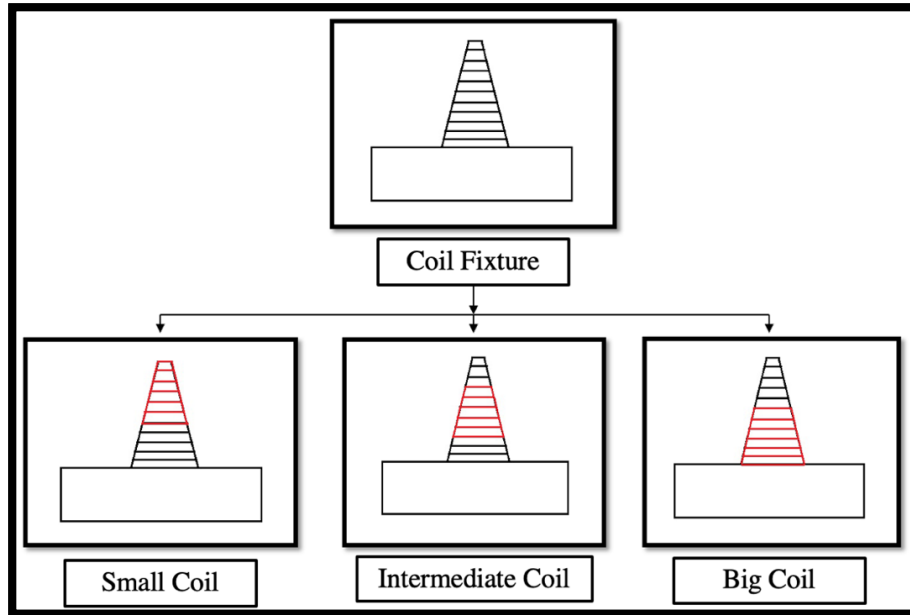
Coil fixture 2D illustration with three coil design divisions
